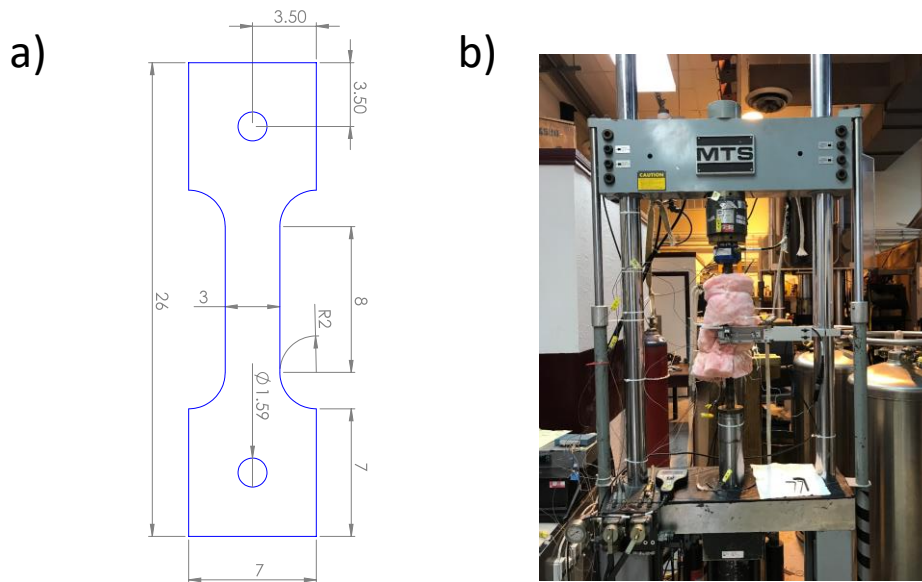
a) Technical drawing of flat dog bone samples used in monotonic tension, superelasticity, and isobaric heating cooling tests. All dimensions are in mm. Thickness can be anywhere between 0.75 mm to 1.5 mm b) Picture of servo-hydraulic test frame (MTS 312.31).
